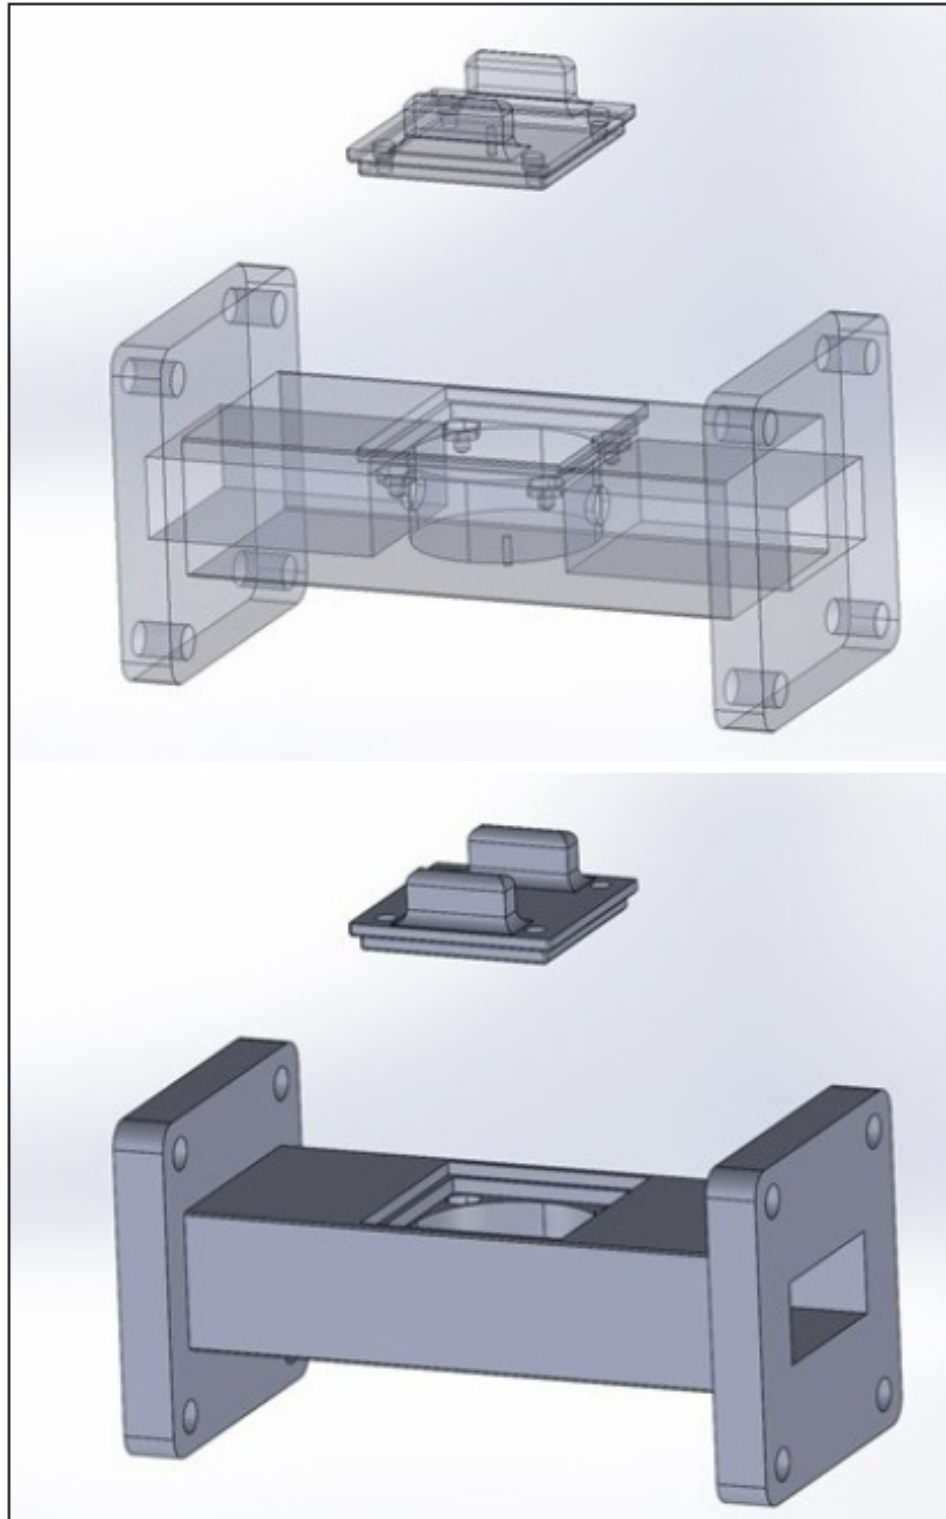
CAD modified rendering of the cylindrical cavity design within a rectangular waveguide and including the network analyzer flanges: removable top design (top); external housing (bottom).
